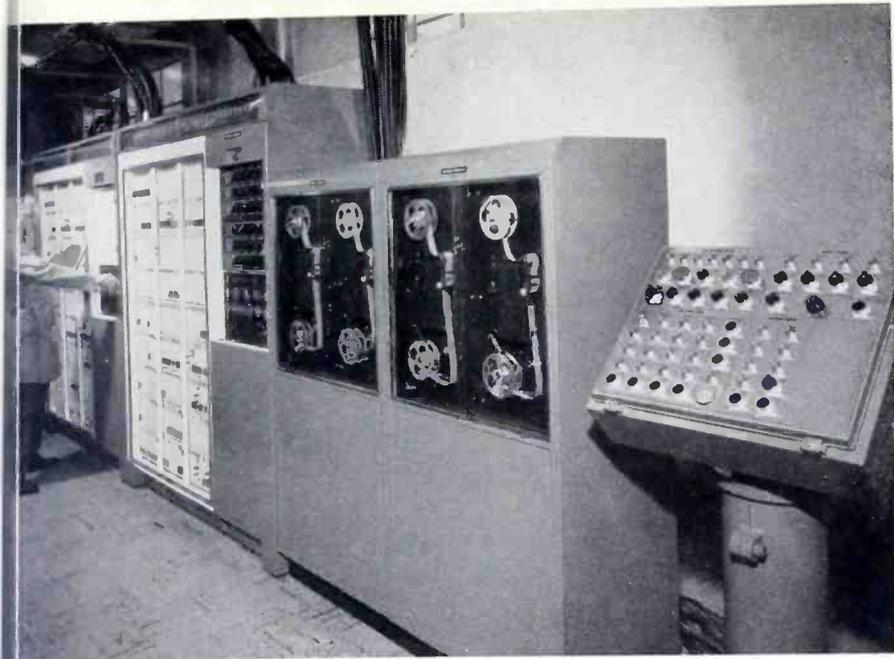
This is the electronic "Digitape" nerve center of the electronically controlled machine. Norman Wells, Hughes research assistant, checks drilling control cabinet.
